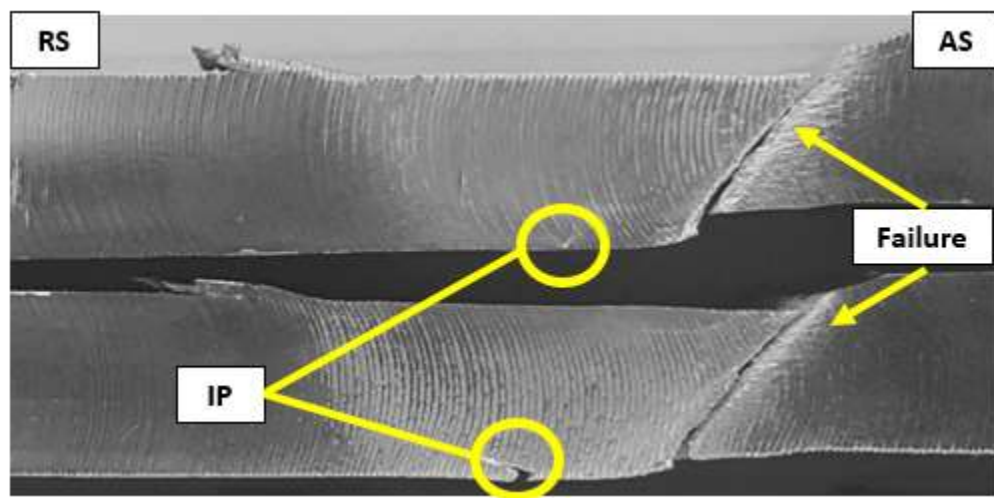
Select fracture specimens from schedule #1 from OLSS-1 weld configuration.
